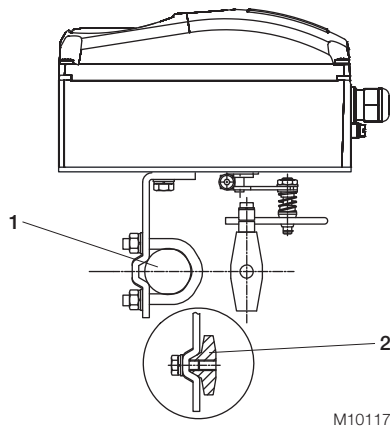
Mounting to linear actuators to DIN/IEC 534
